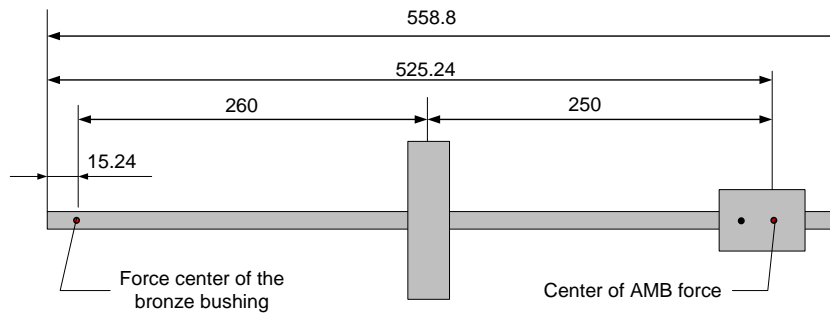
4 Major dimensions of the rotor assembly with an AMB rotor and a disk (in millimeters)
